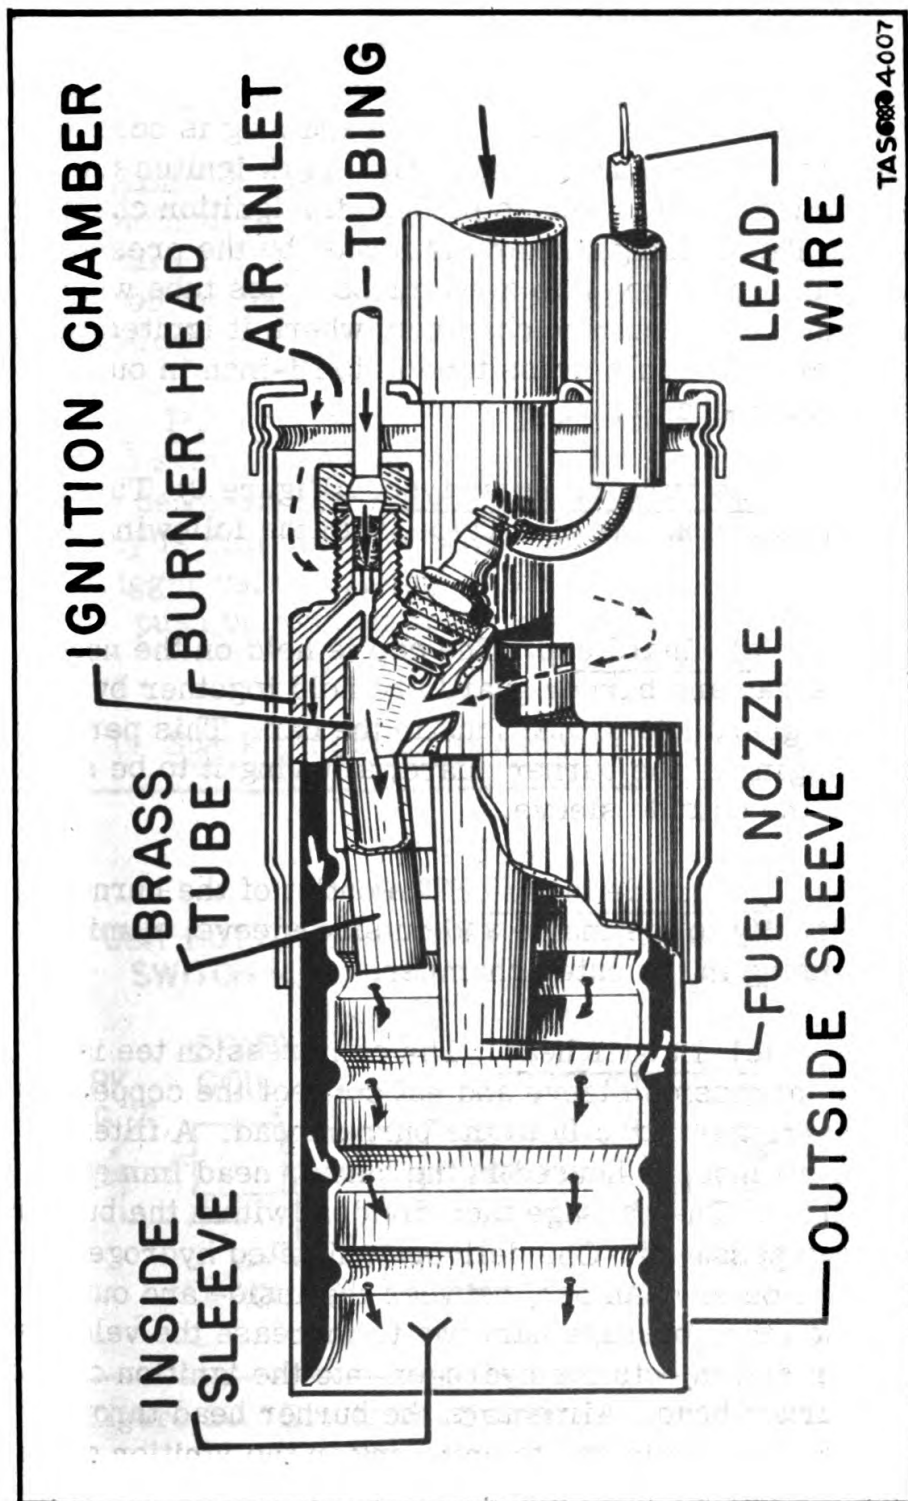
Gas Burner Assembly, Newer Type, Cross Section.
